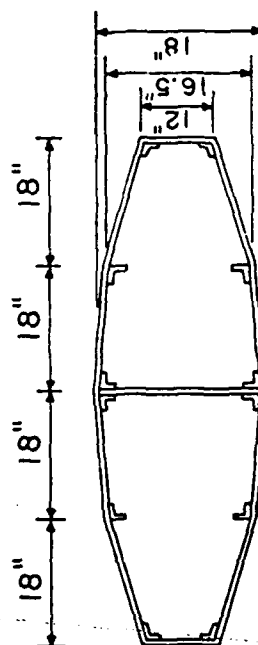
A section of a full wing used for testing purposes. All the wing dimensions needed for creating a finite element model are given for this structure.
